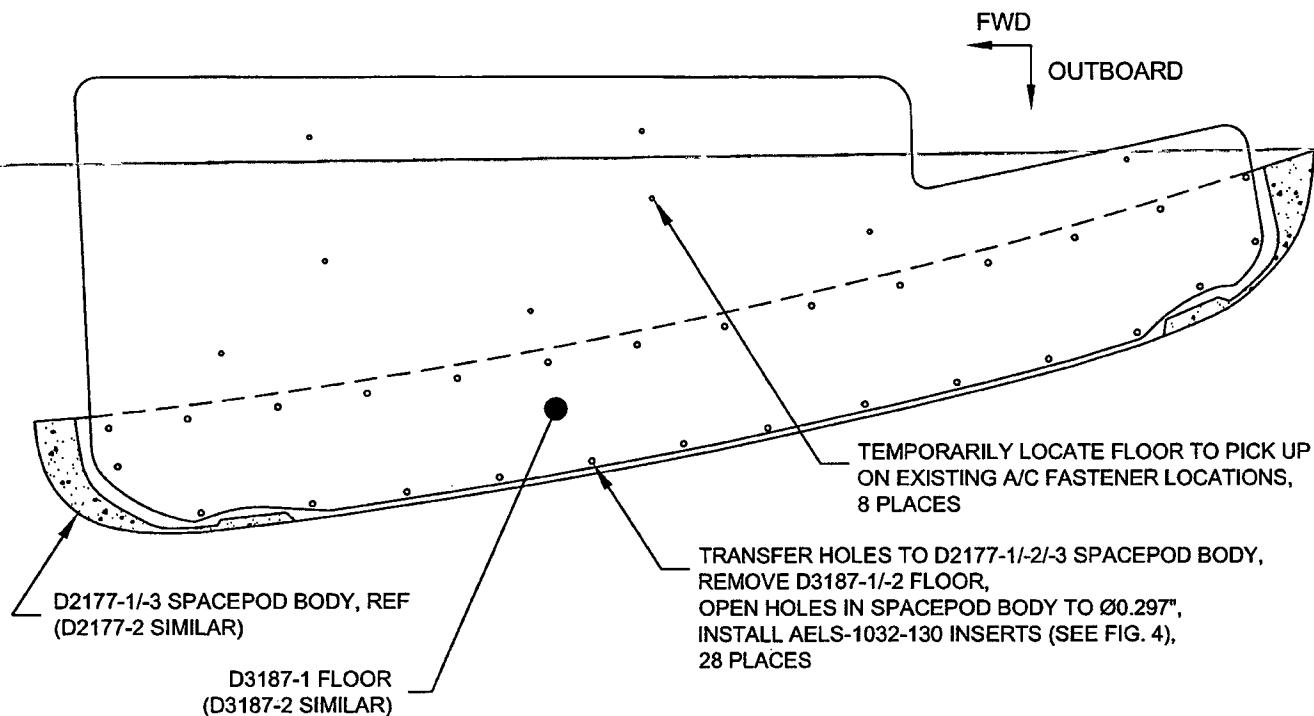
TRANSFERING FLOOR HOLES TO SPACEPOD
